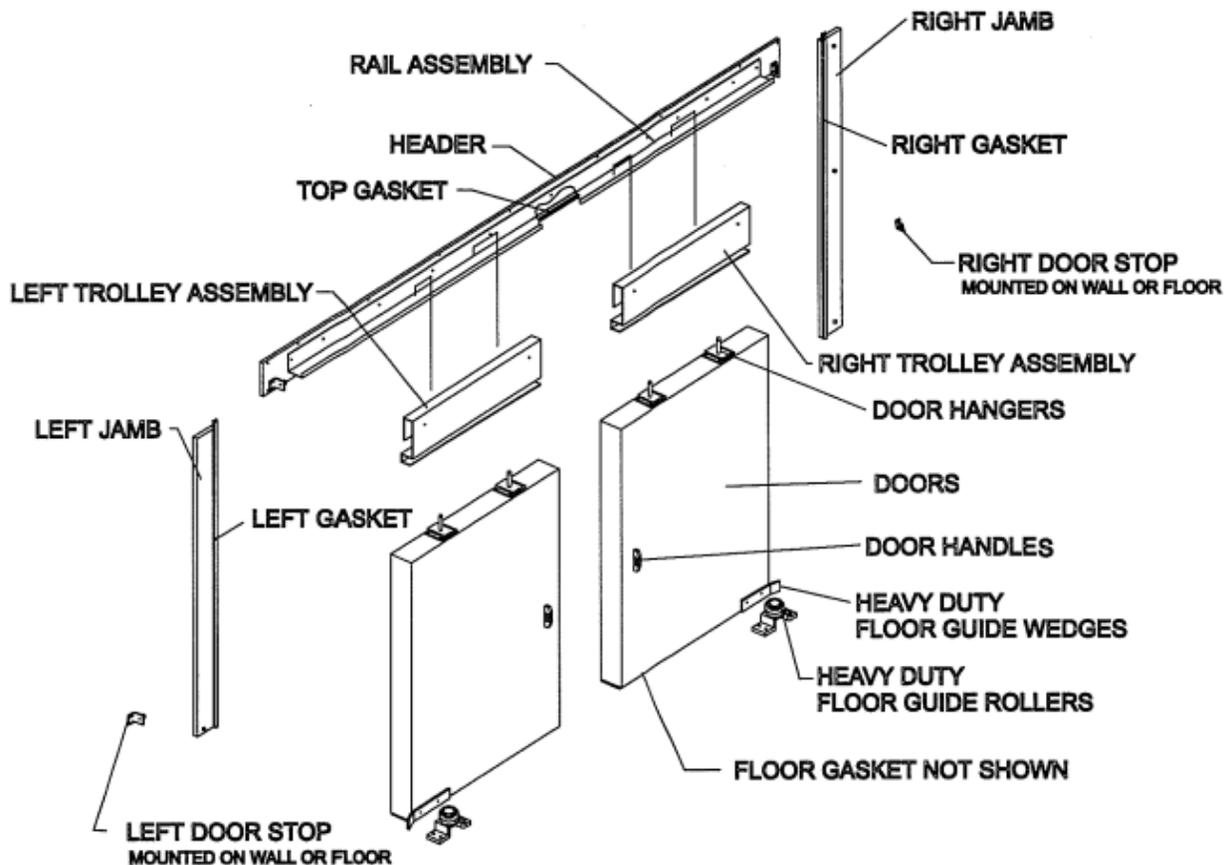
shows a typical 8600 bi-parting door system as it would be sent to the job site for installation
